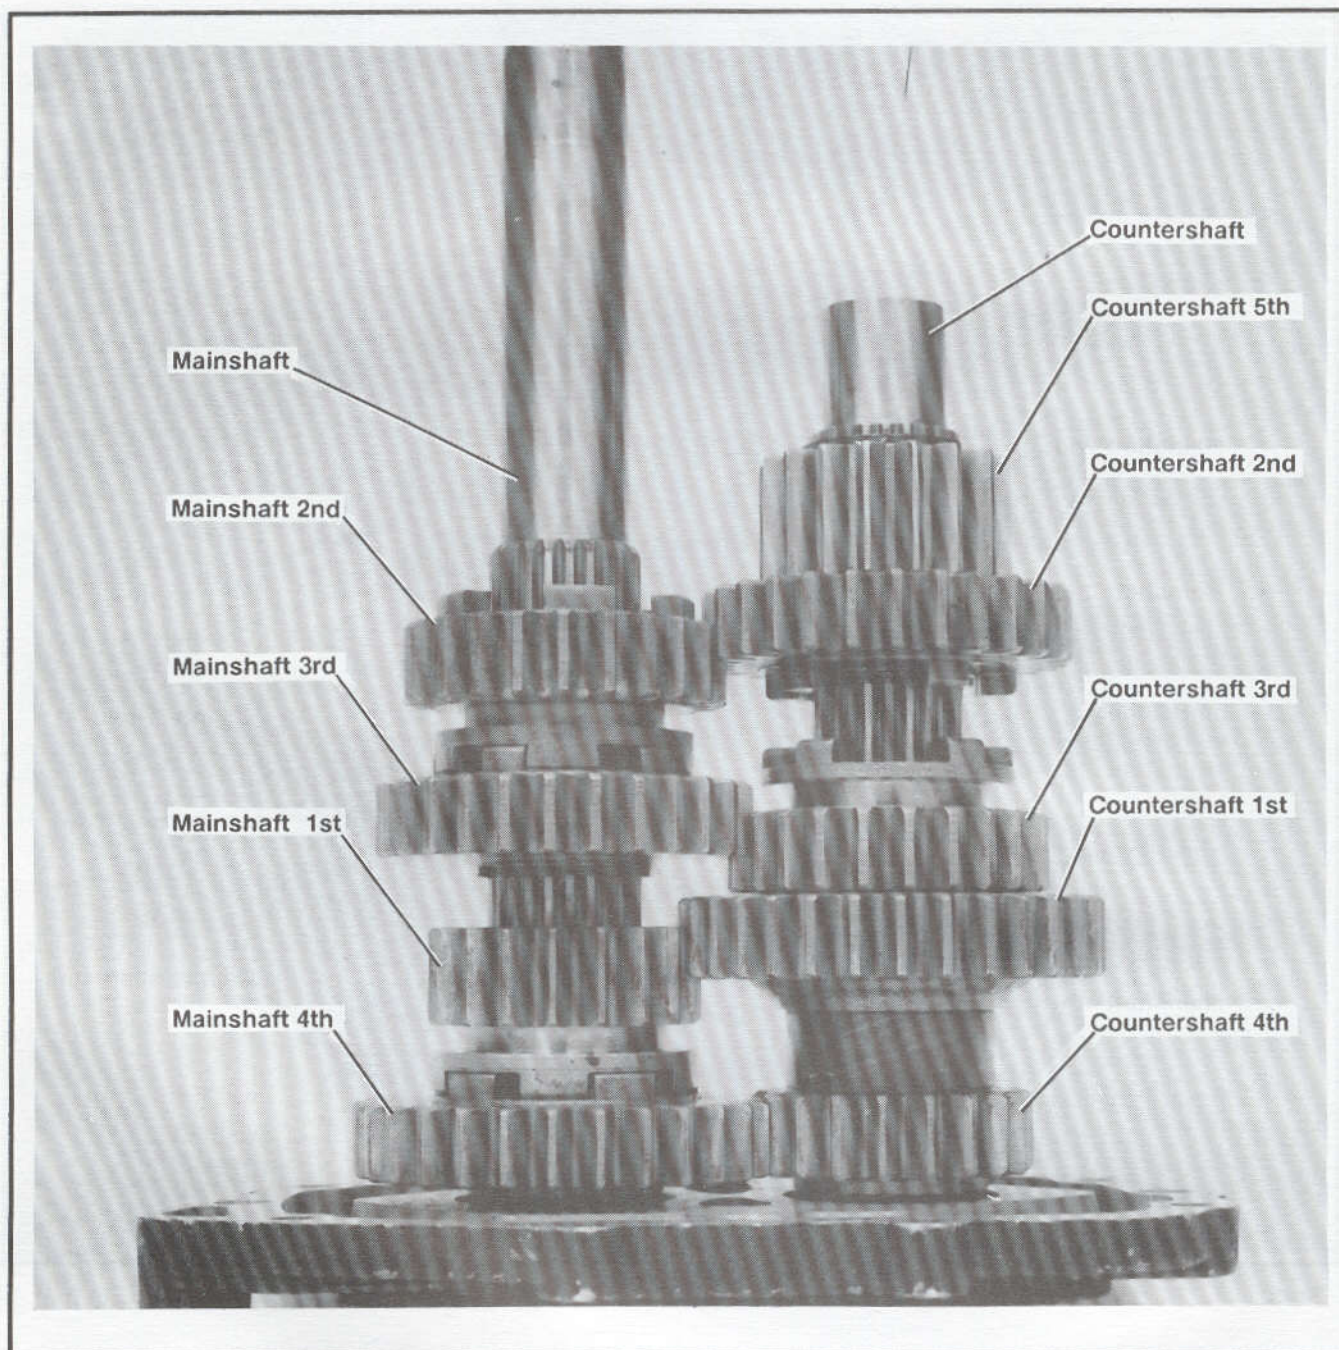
Side Door, Mainshaft and Countershaft - Final Assembly
